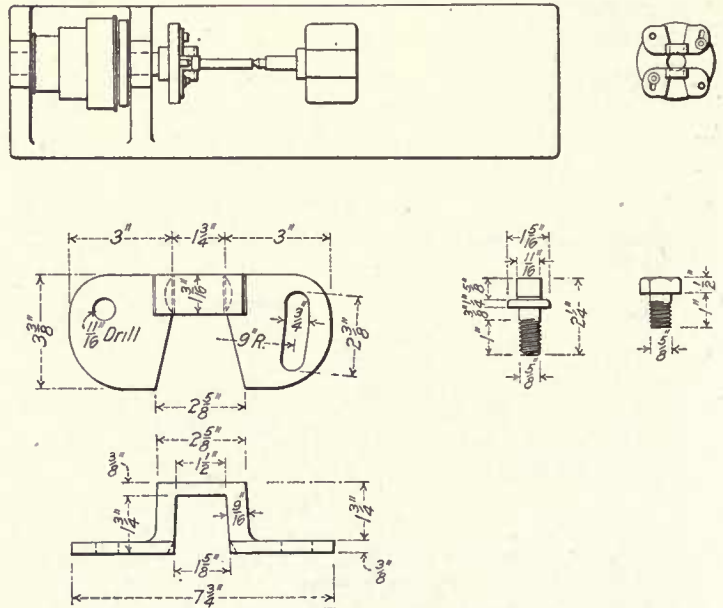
Adjustable Chuck for Holding Bolt Heads.
